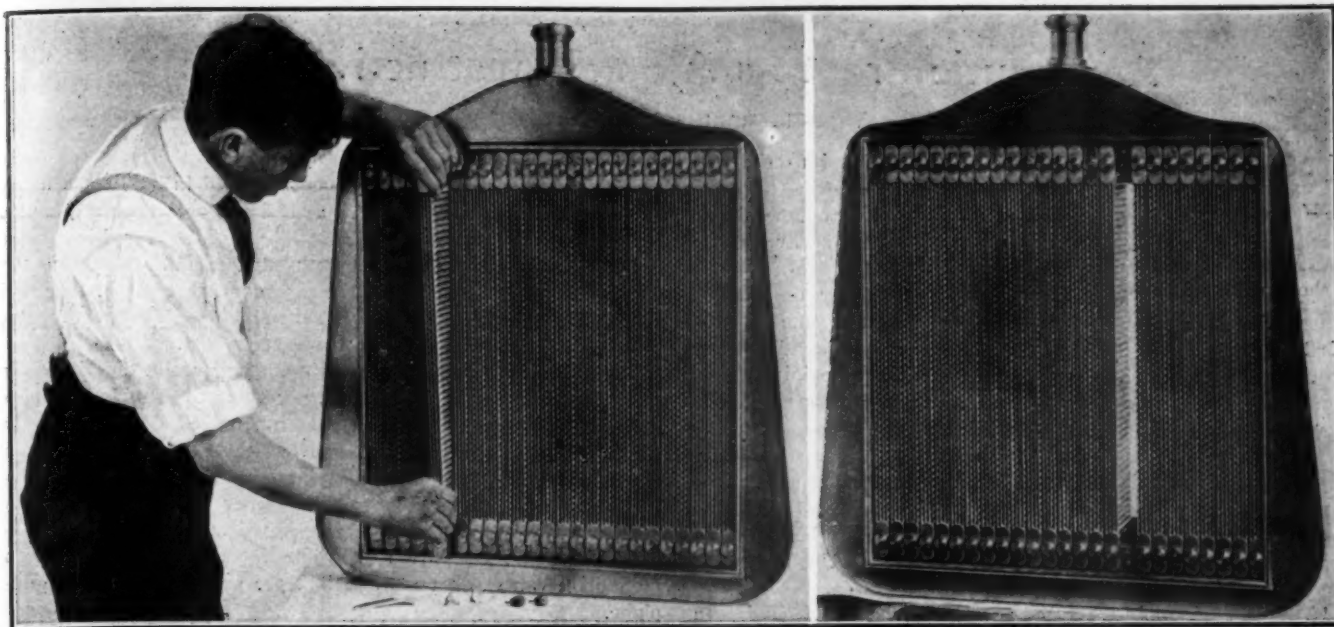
Method of removing individual sections of the new radiator. At the right, appearance when a section is removed
